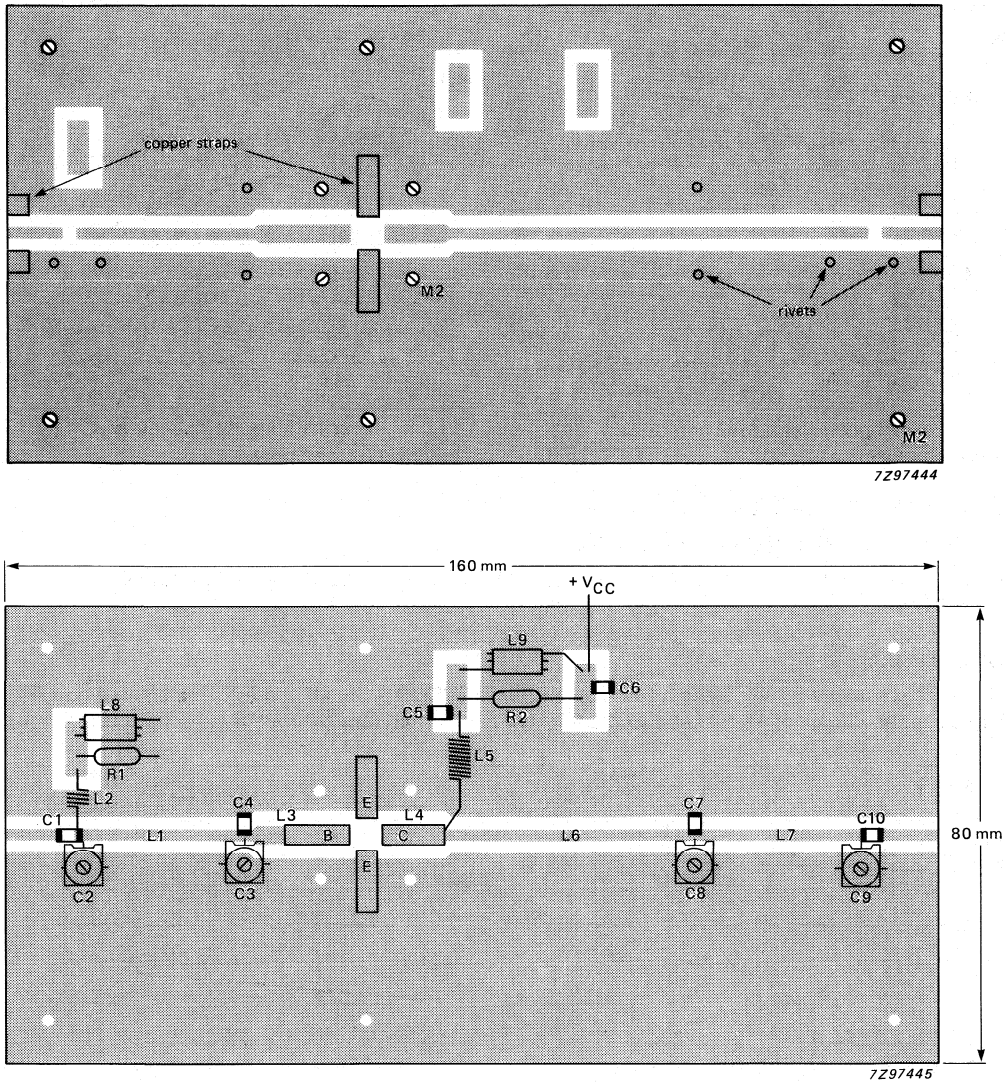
Printed-circuit board and component lay-out for 900 MHz class-B test circuit.
